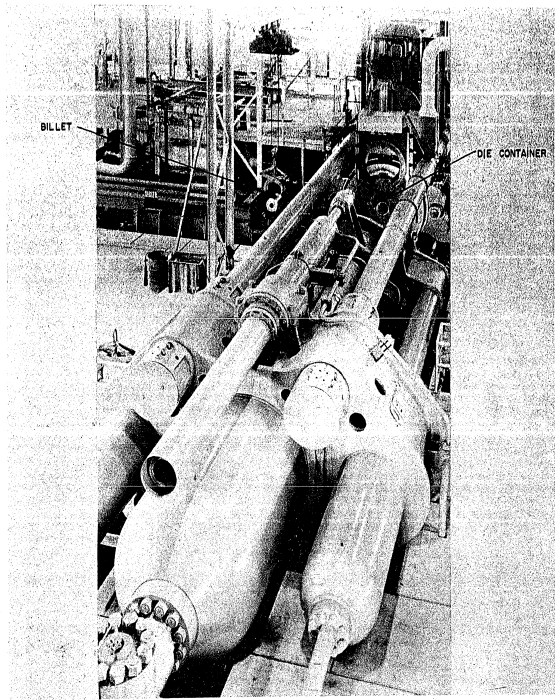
(b) - TOP VIEW OF THE 12,000 TON EXTRUSION PRESS, NOTICE THE BILLET IN POSITION TO BE TRANSFERRED INTO THE CONTAINER
